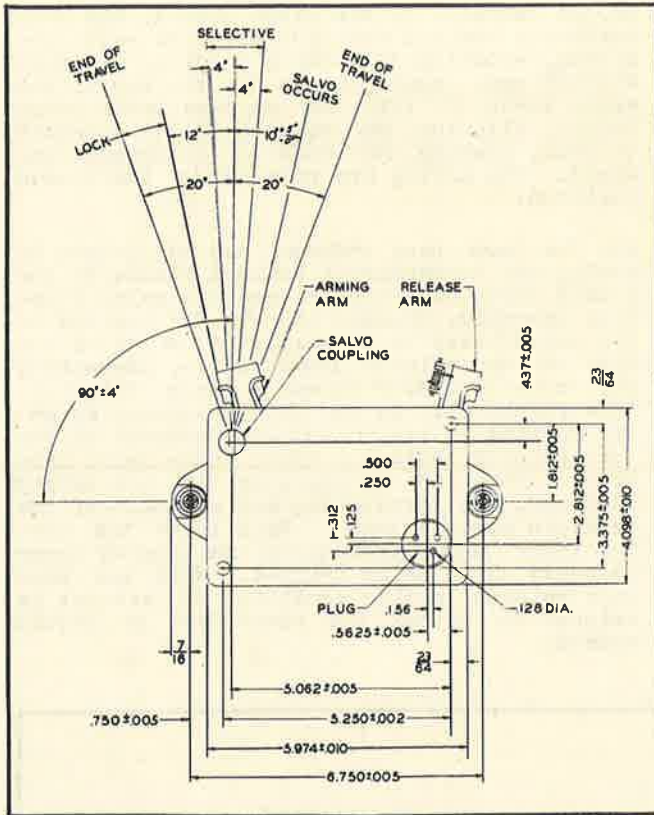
Dimensional Drawing and Salvo Coupling Movements - Right-Hand
